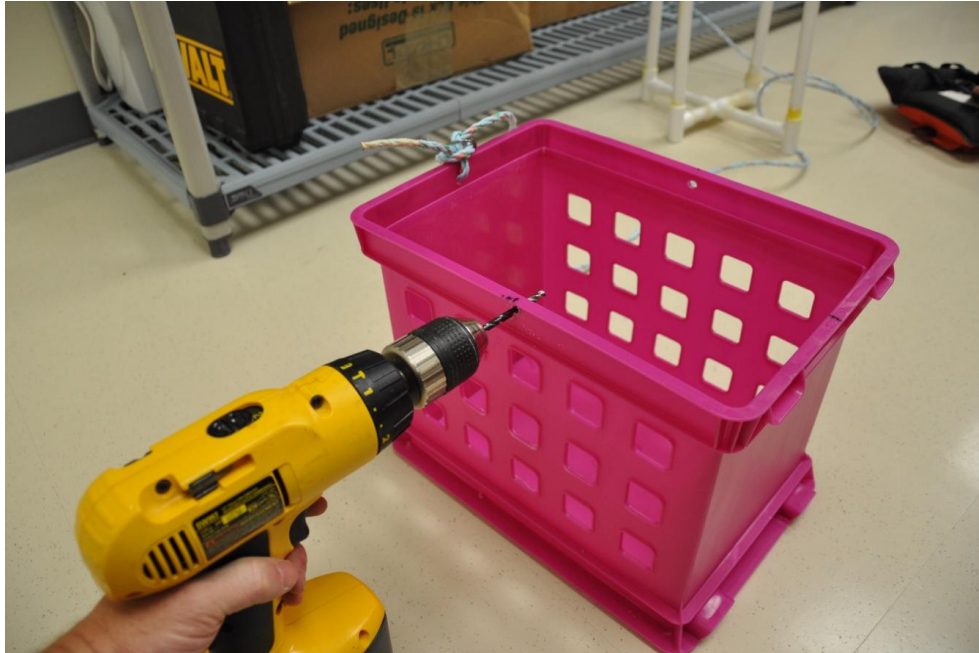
Drill hole is shown in the crate, in the middle of the crate.
